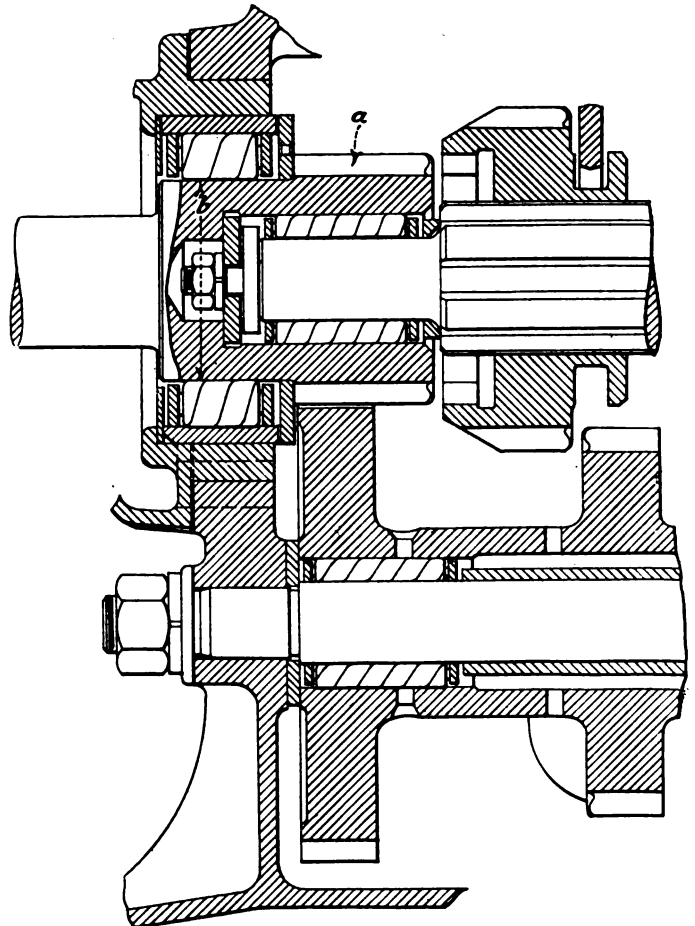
FRONT END OF A TYPICAL TRANSMISSION SHOWING HOW THE MAIN DRIVE GEAR IS CARRIED ON A ROLLER BEARING
